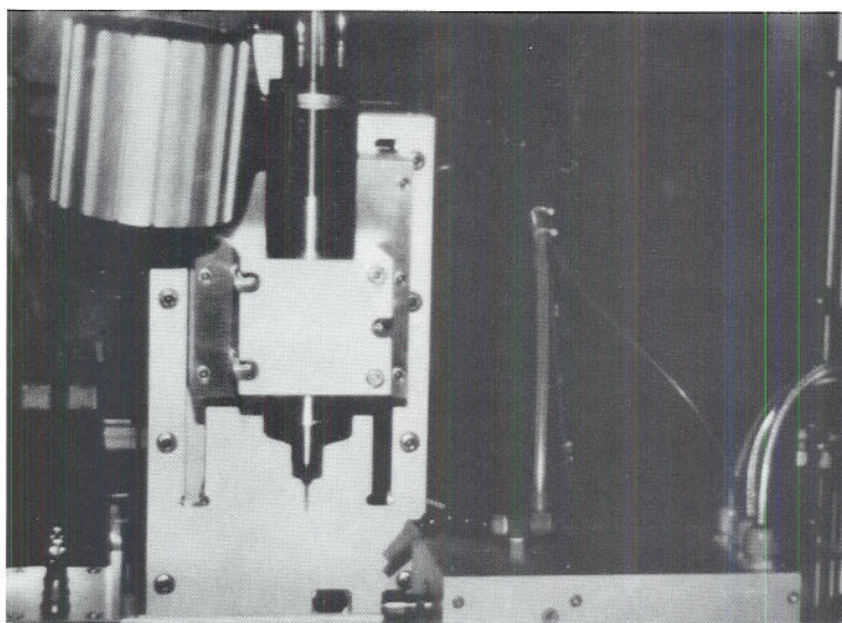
The milling machine of the Dens prototype system in Berlin.
